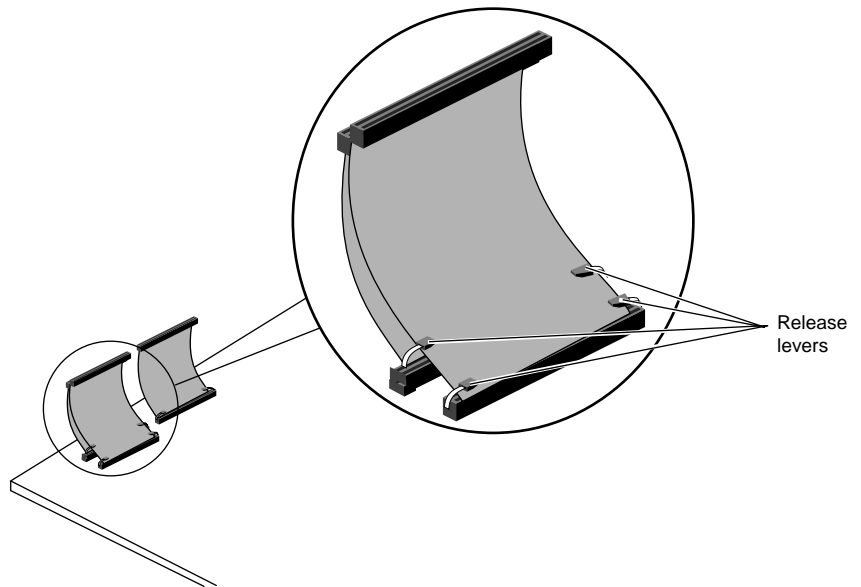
Attaching the Video-Graphics Cables to the Graphics Board Connectors
